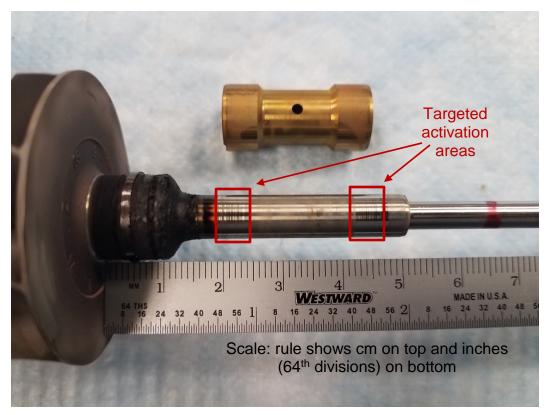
Turbo shaft wear areas shown with journal bearing and scale
